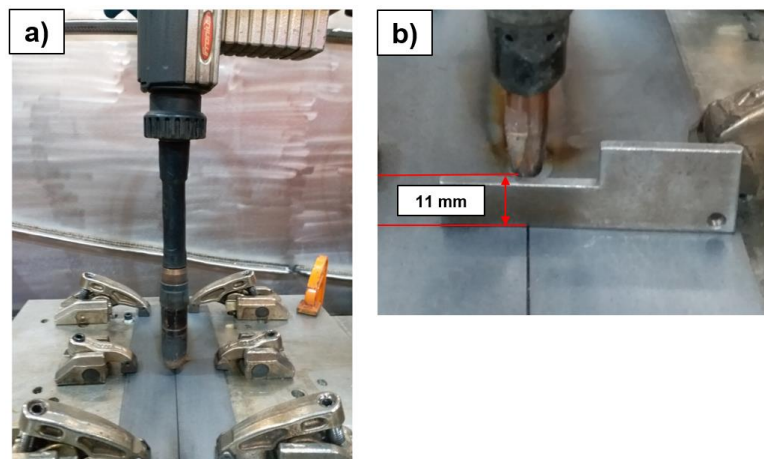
a) Torch angle used for welding b) CTWD
